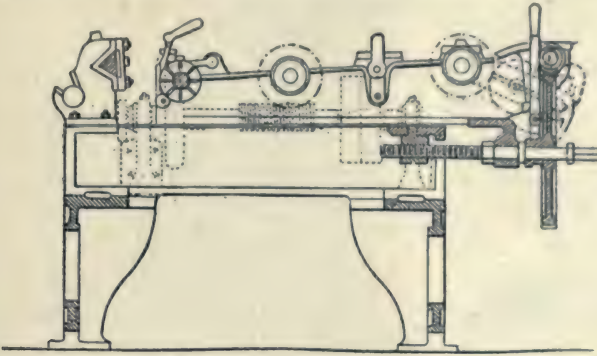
Machine for cutting a continuous sheet of rubber.
